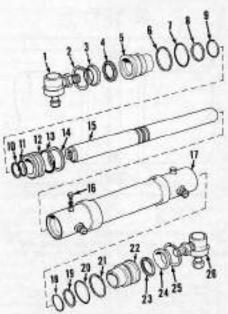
Exploded view of steering cylinder us-ed on models equipped with David Brown front drive axles.
